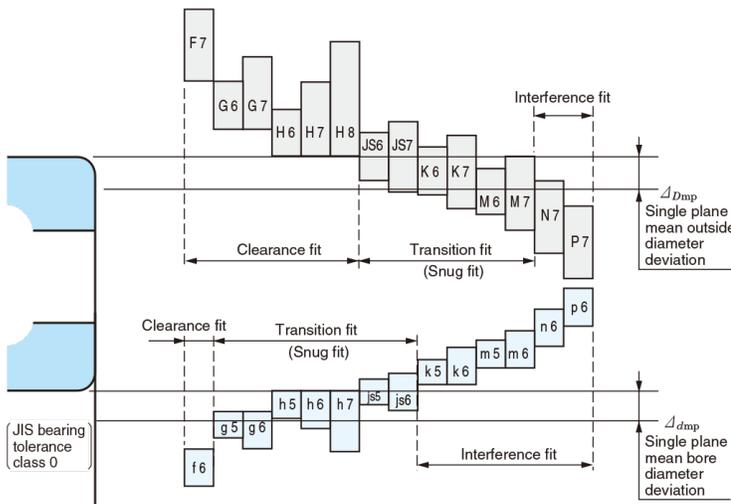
Tolerance & Fit for Shaft and Housing
